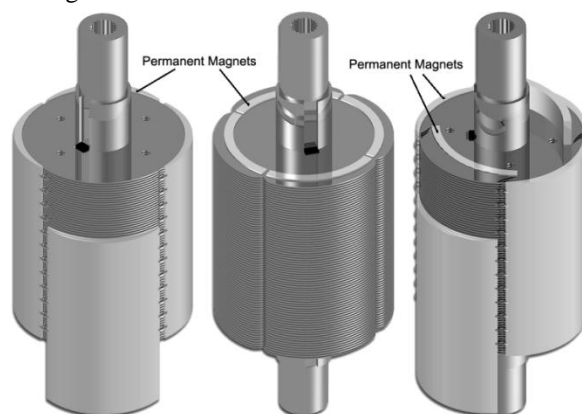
(a) Surface PM rotor (b) Internal PM rotor (c) Hybrid PM rotor
